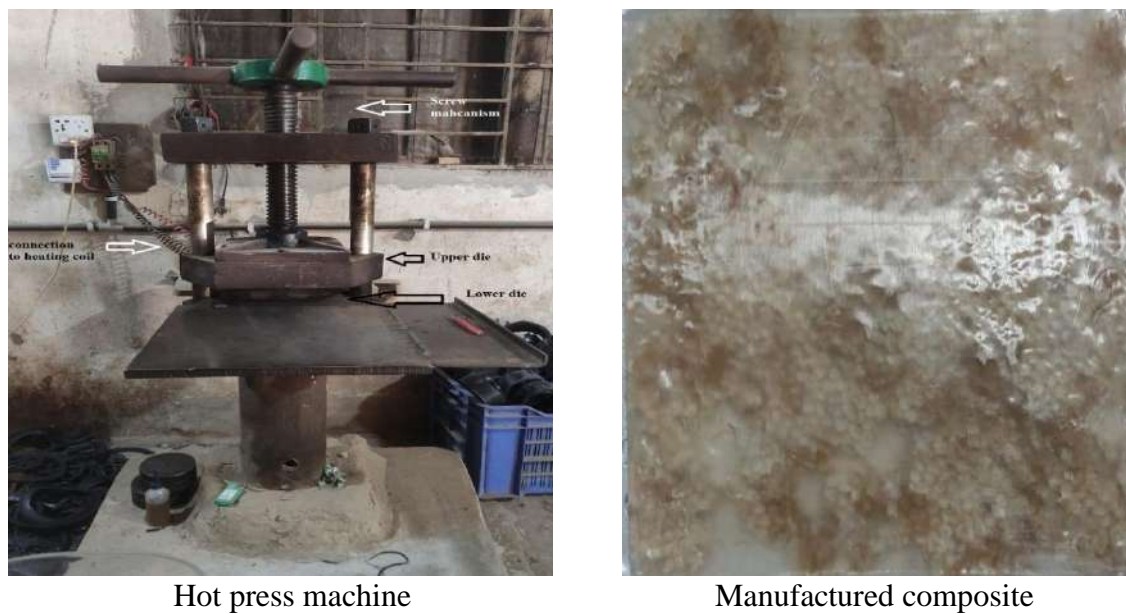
Photographic view of hot press machine and manufactured composite
